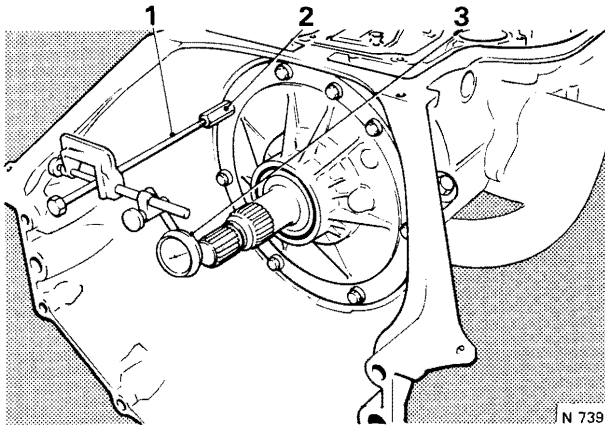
CHECKING THE FRONT UNIT END FLOAT
